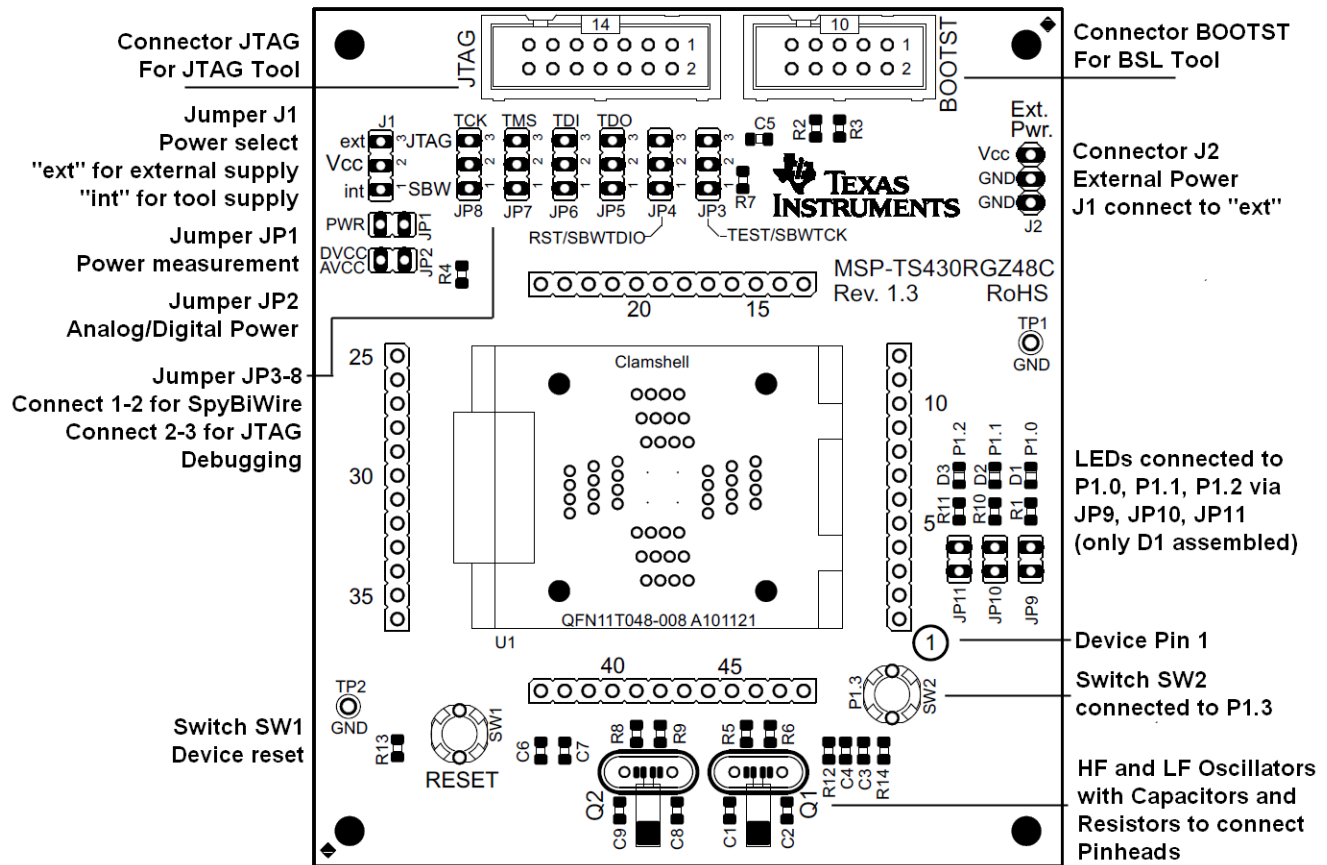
MSP-TS430RGZ48C Target Socket Module, PCB
